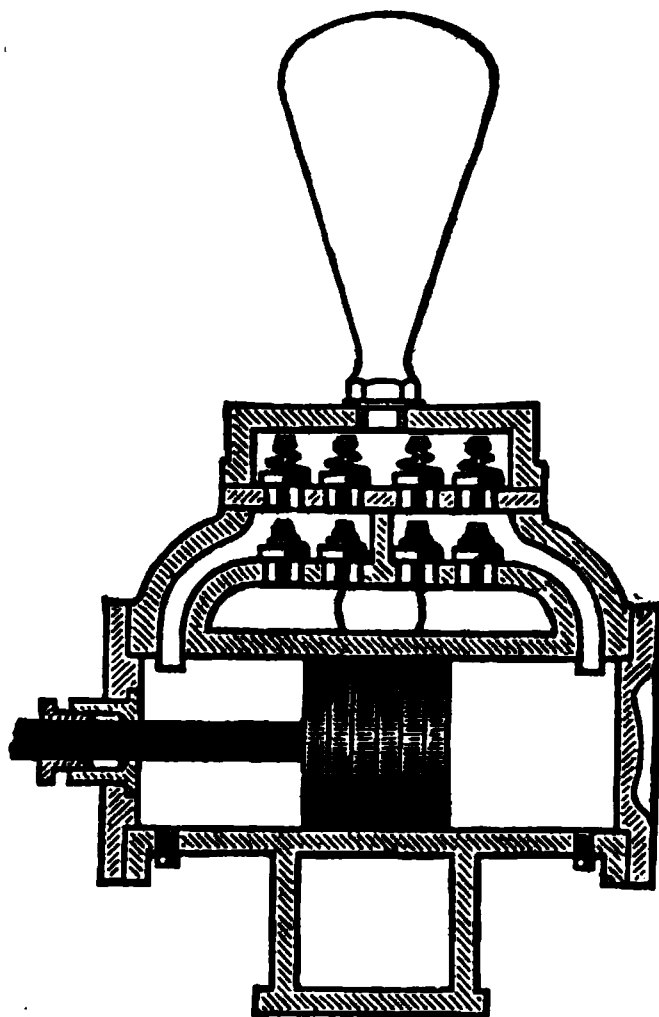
,225.—Double acting piston water end, showing sectional view of piston, cylinder, stuffing box, valves, and water passages. The lower row of valve are the inlet valves, and the upper row the discharge valves.
